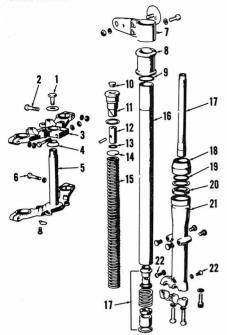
Exploded view of F5 front suspension unit. Other units are similar.
